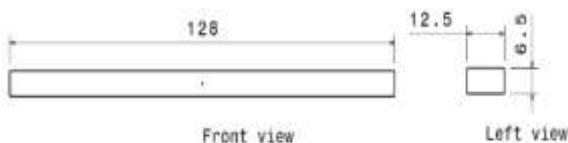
Flexural Test Specimen (All dimensions are in mm)
